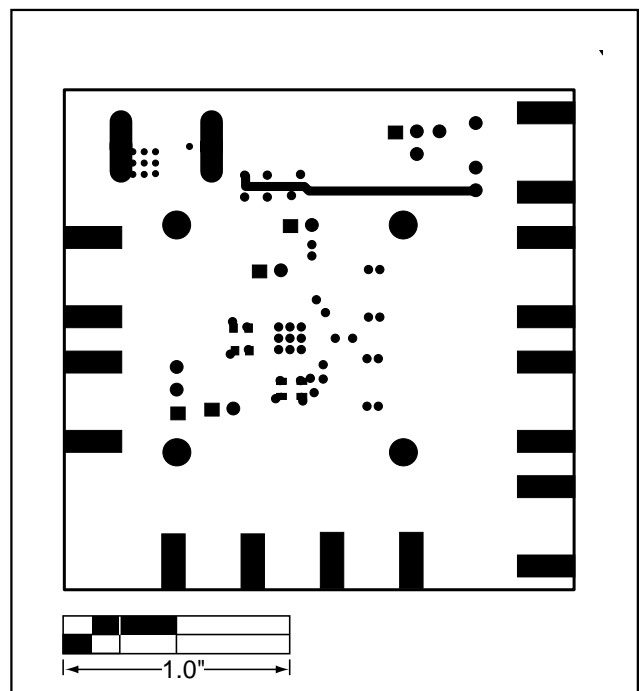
MAX3875 EV Kit PC Board Layout—Solder Side
